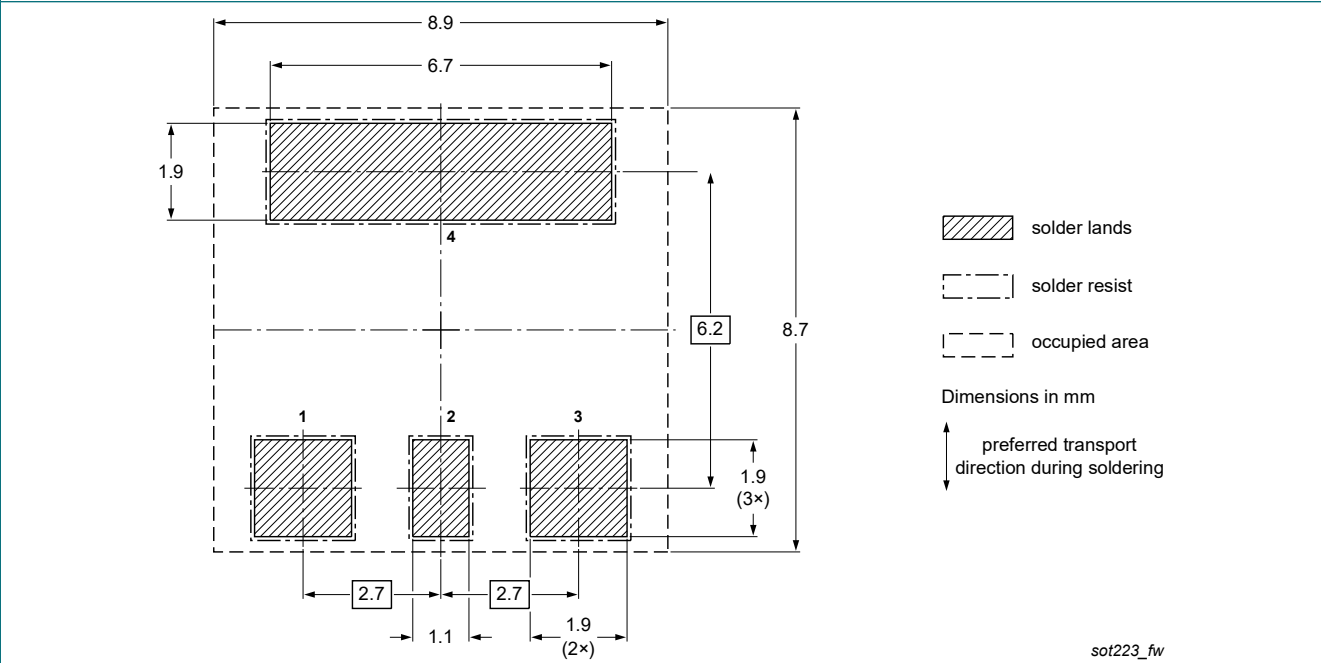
Wave soldering footprint for SC-73 (SOT223)
